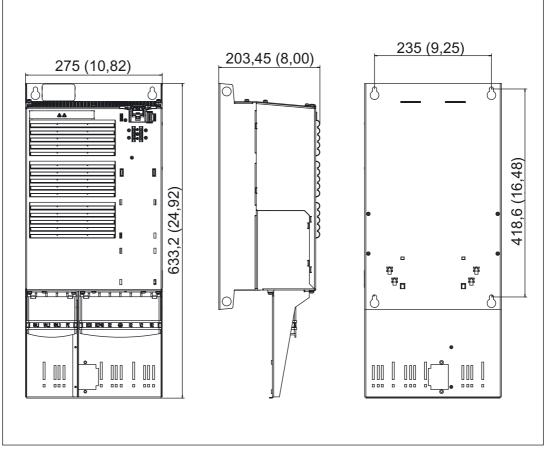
Dimension drawing of PM340 Power Module with Screening Kit, frame size FSD, all dimensions in mm and (inches)
